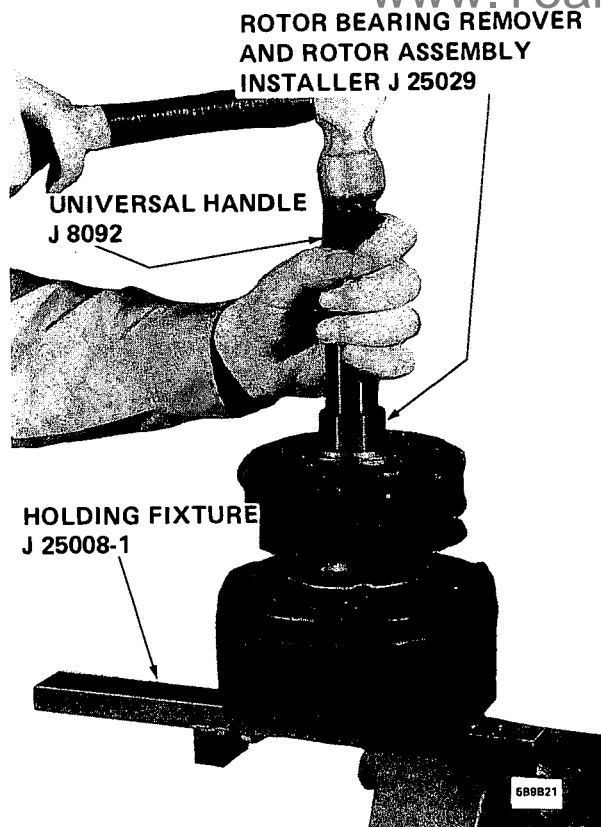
B-45 - Installing Clutch and Pulley Assembly - 4 Cylinder Compressor
